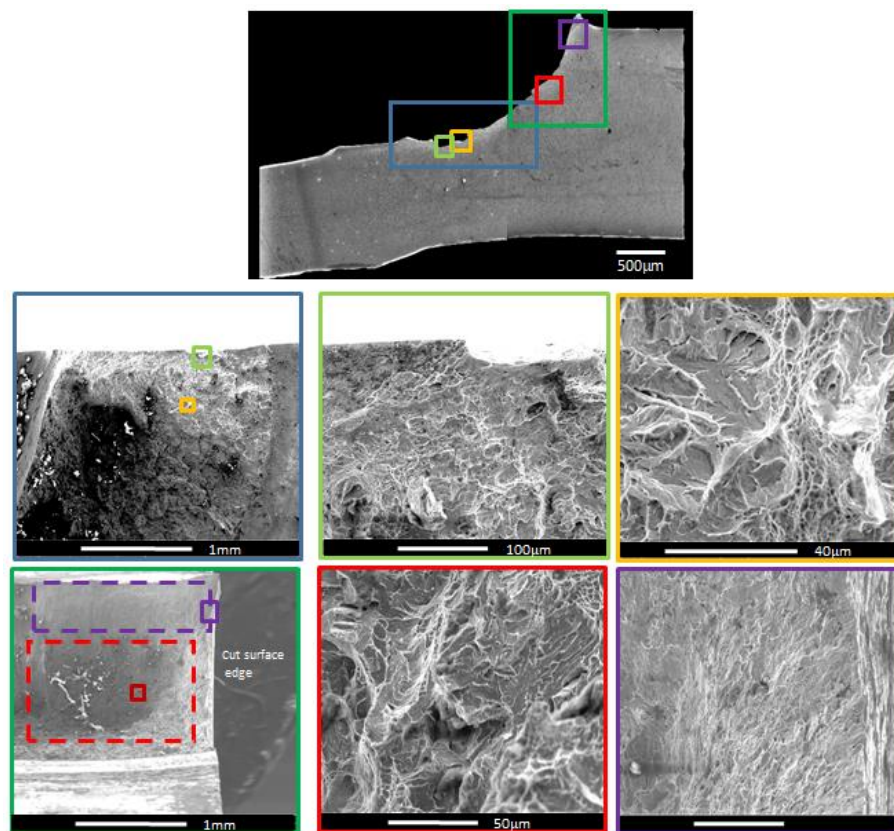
Fracture surfaces of DPCP-M samples showing domination of shear and quasi-cleavage failure.
